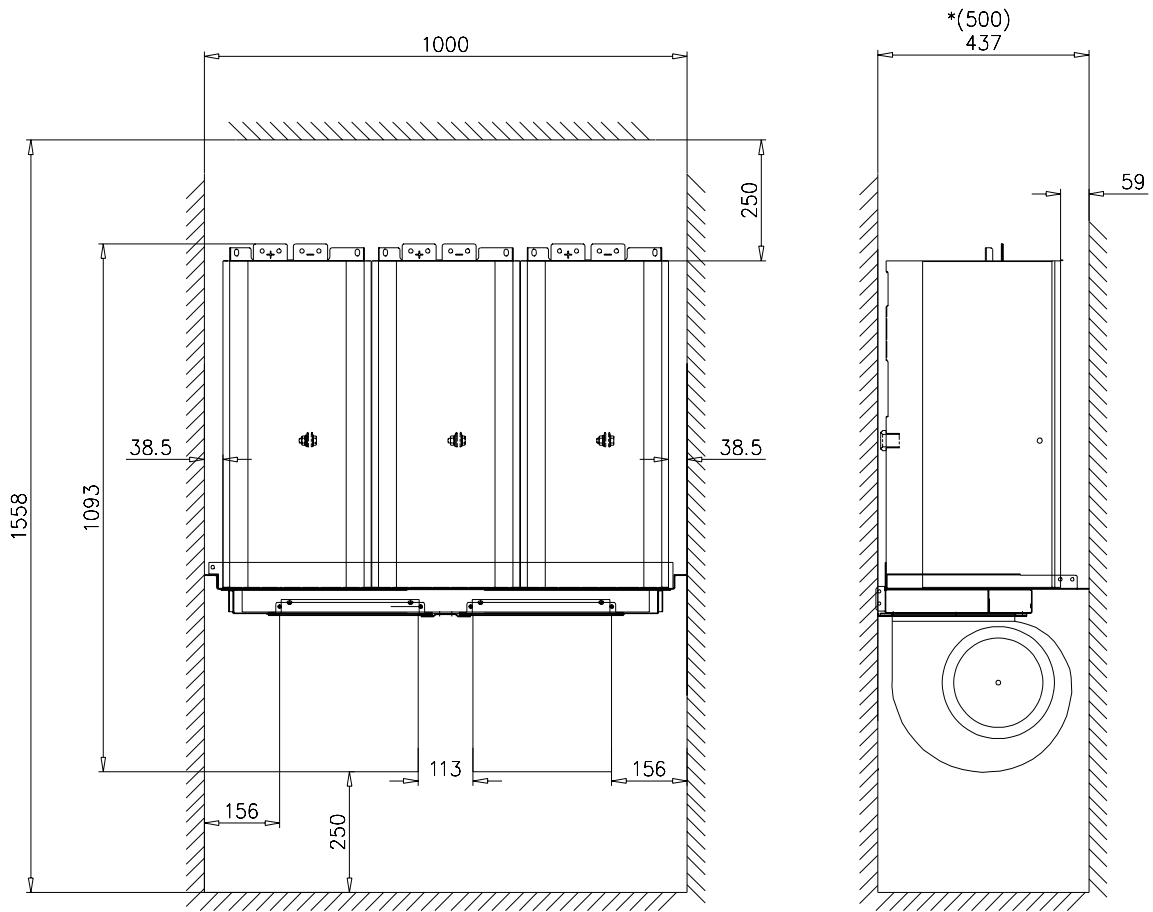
Module mounting plate for Frame R8i/R9i modules.
